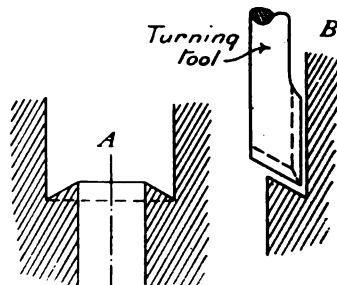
SOLID PUMP VALVE SEATINGS.
